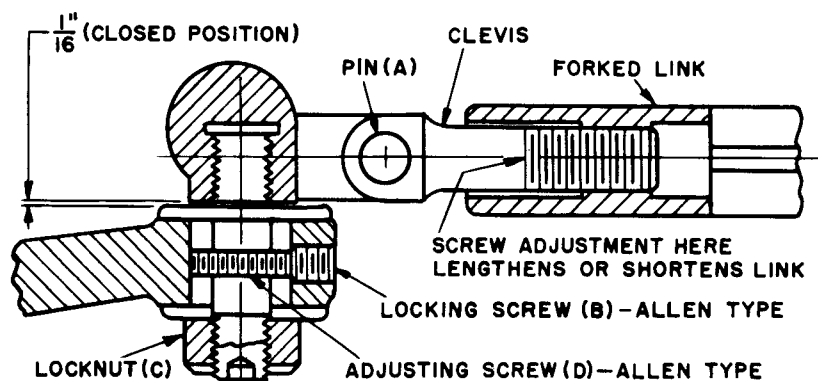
Section of blade operating crank and connecting link screw adjustment
